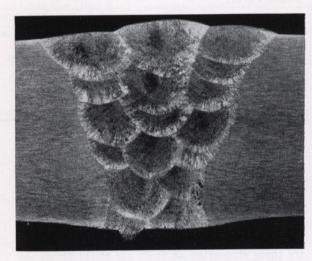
Butt weld in 11/4-inch thick aluminum plate made in 17 passes by the inert-gas-shielded metallic-arc (Aircomatic) process.
